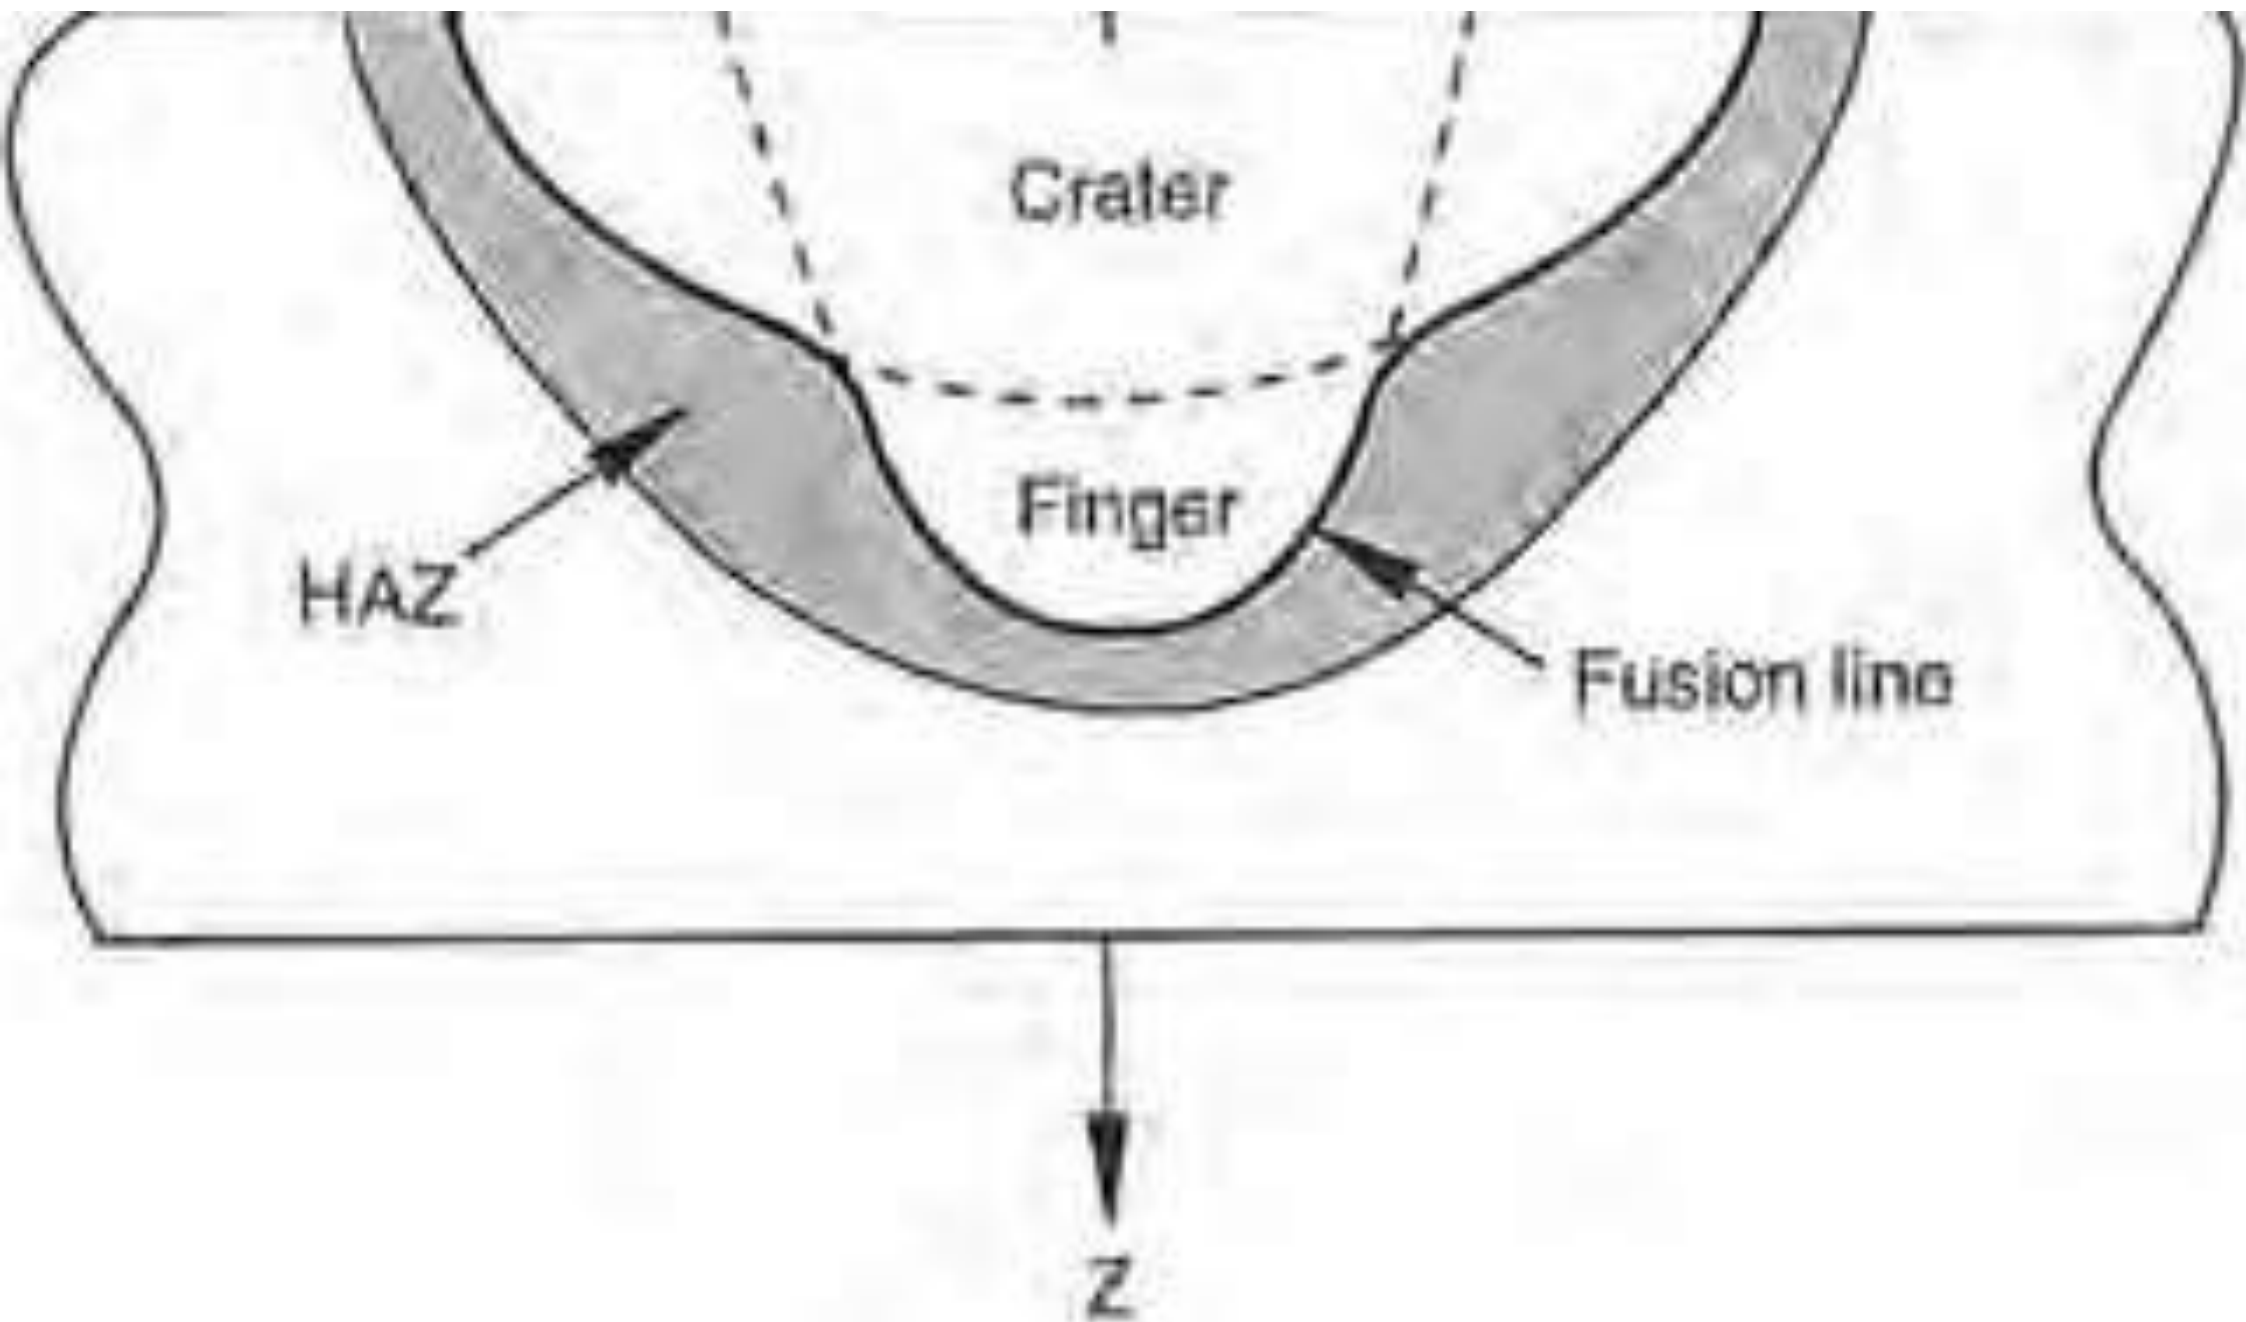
Schematic diagram showing the weld crater/weld finger formation during stringer bead welding. HAZ, heat-affected zone. Source: Ref 1
